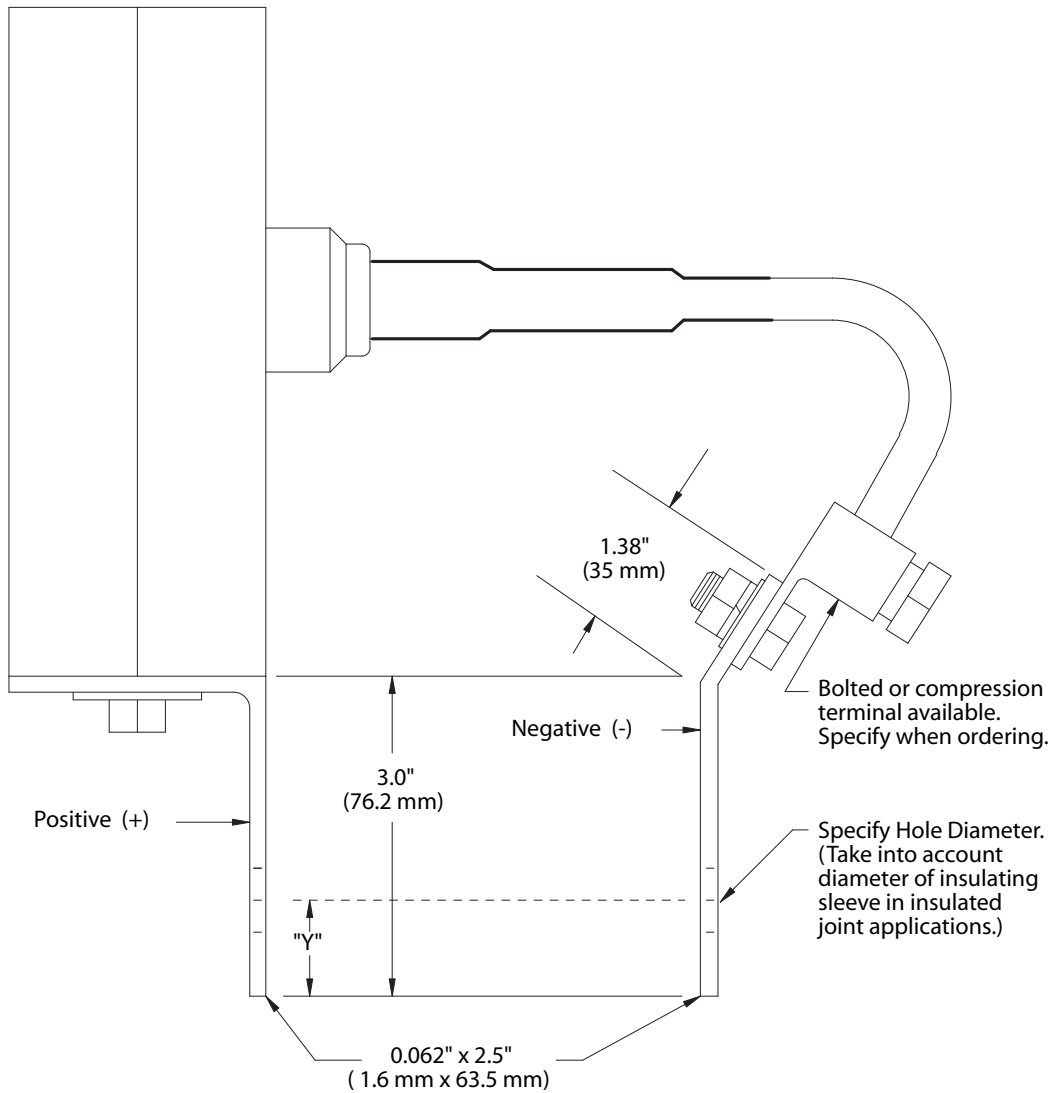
Insulated Joint Application – Flange Mount Using Welded Hex Bolts
